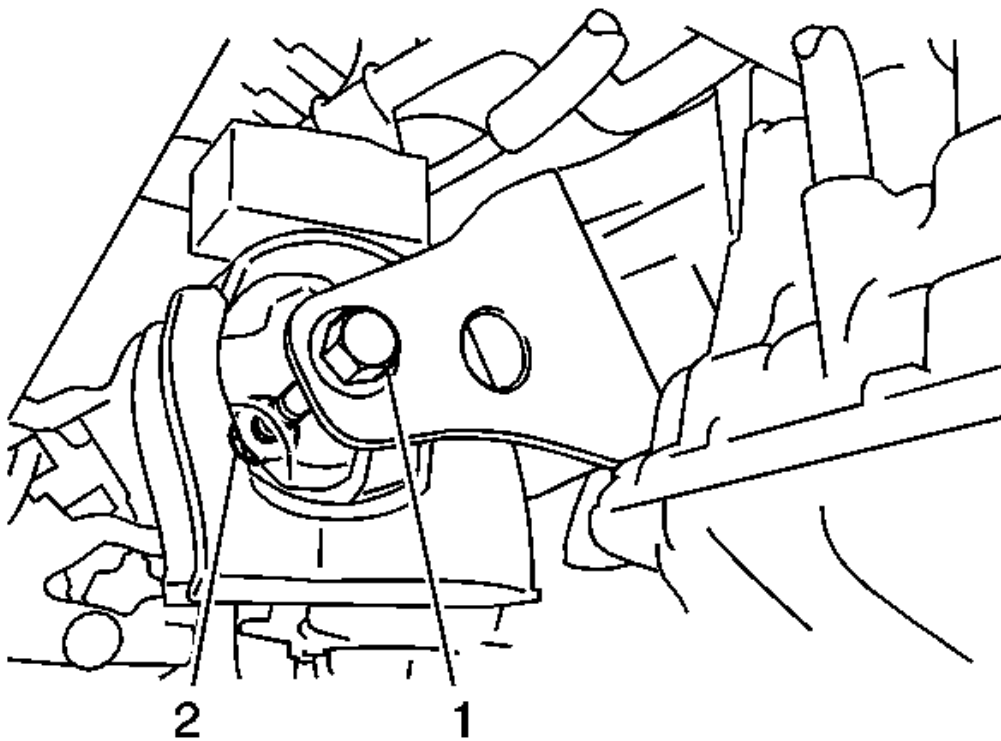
Identifying Front Engine Mounting Insulator Bolt
